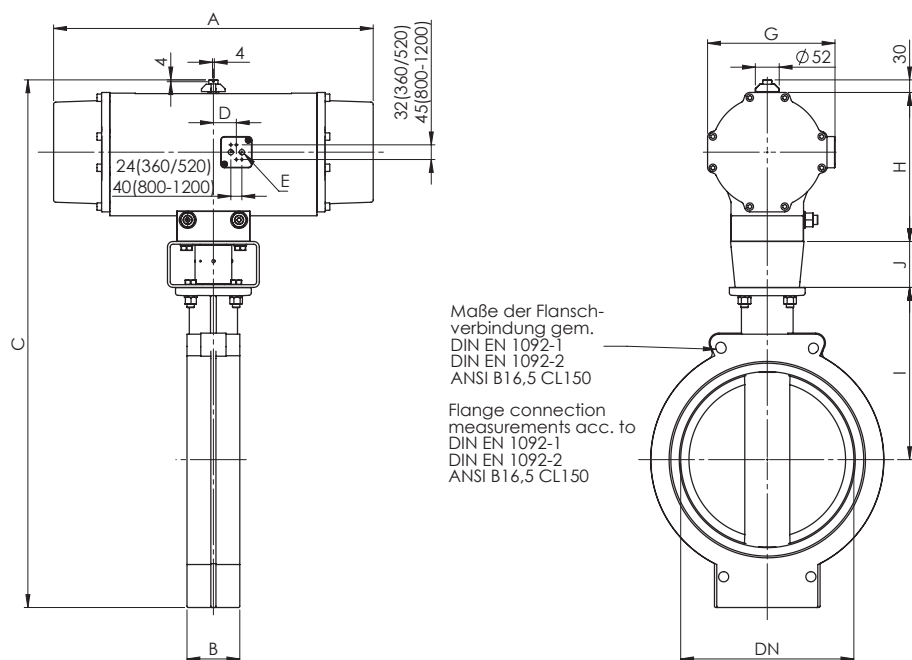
Dimensional drawing Type PZR with actubar type AD/AS-360-1200
